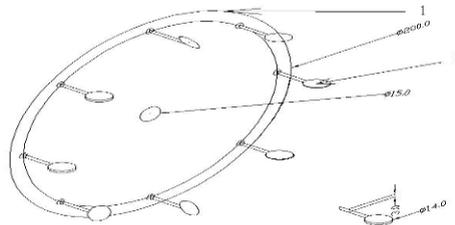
Seed metering mechanism used in developed bullock drawn dry paddy seed cum fertilizer drill
